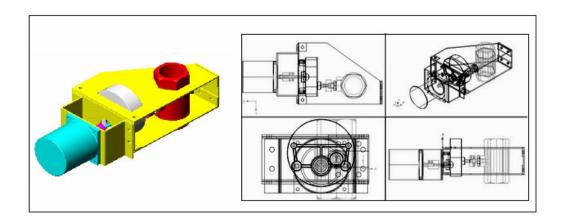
Assembly of Servo Motor, Gearbox and Ball Valve
